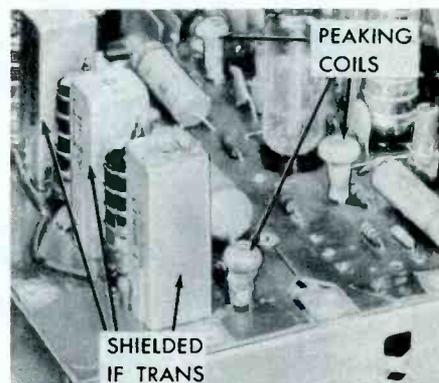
Components Mounted on Printing-Wiring Board in the Westinghouse Chassis V-2342.
